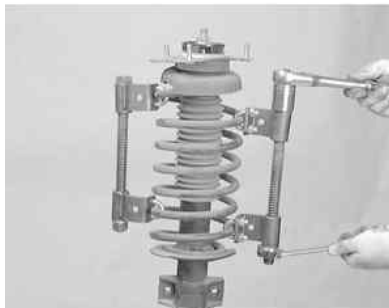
A tool set, such as this one from Lisle®, is available to aid in the removal of the strut bearing
